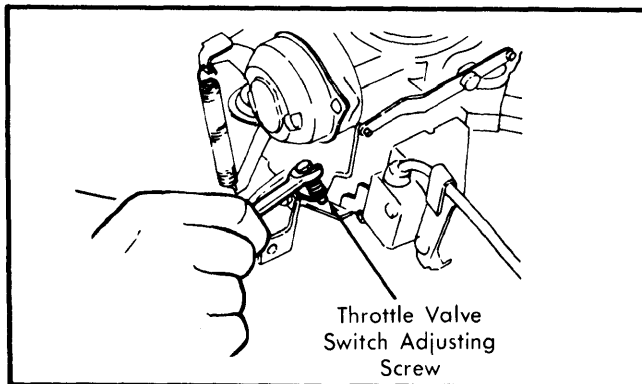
Adjusting Throttle Valve Switch (210 & 310 Models)
